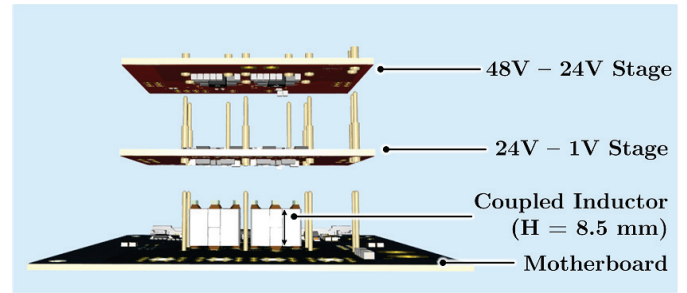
3D assembly drawing of the prototype. Power is vertically delivered from top (48 V), middle (24 V), to bottom (1 V).
